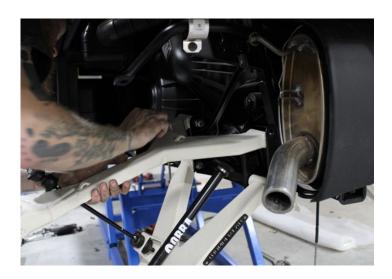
Install Upper Control Arm using 19mm Socket and 19mm Wrench
